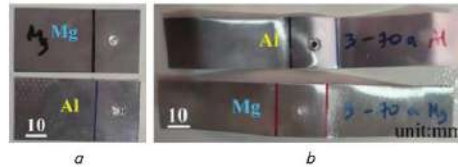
Fracture modes micro-Friction Stir Spot Welding: *a* – shear tensile; *b* – cross tensile
